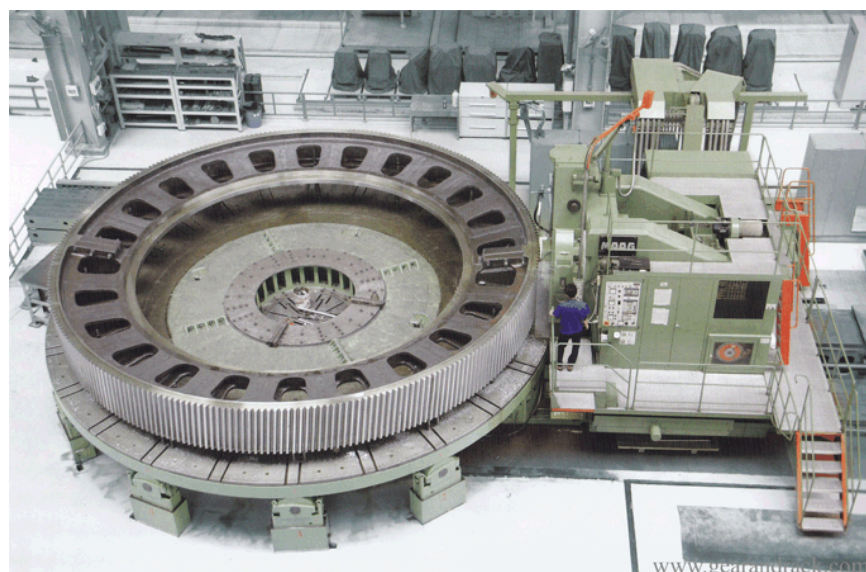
Large 9.936 m diameter gear manufactured by GEARX in China
